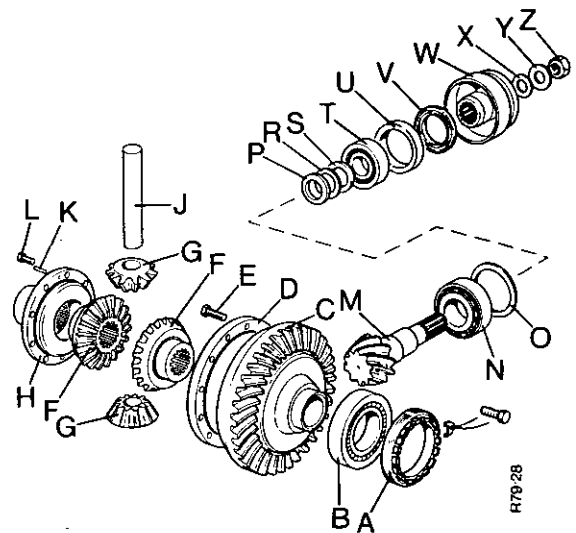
DIFFERENTIAL UNIT ASSEMBLY
